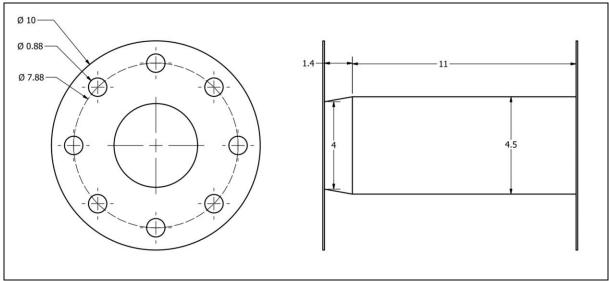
Schematic of canister fabricated to mould, store and launch EVO-Pig
